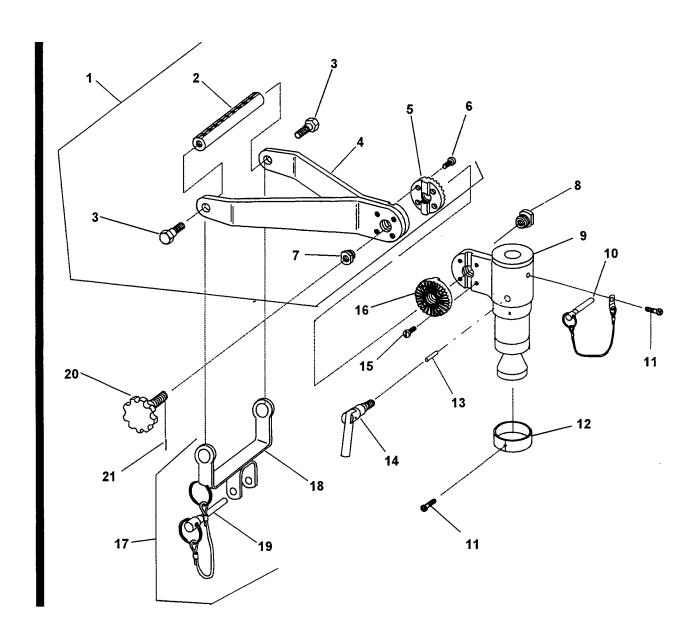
Adapter, Universal Pintle, 12012061, Arm Assembly, Traverse, 6650488, and Body Assembly, 6650487
